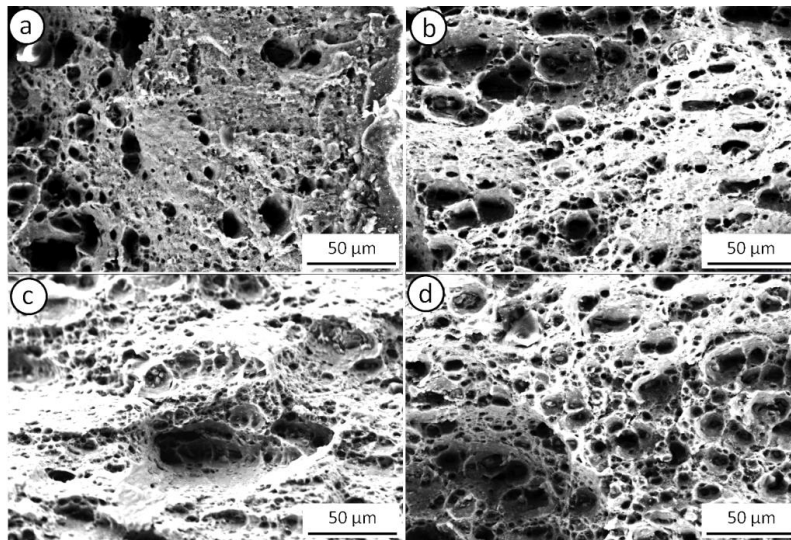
Fracture surfaces of tensile samples across the built direction of (a) IN718, (b) ER2205, (c) ER316L and (d) fracture surfaces of tensile samples along the built direction
